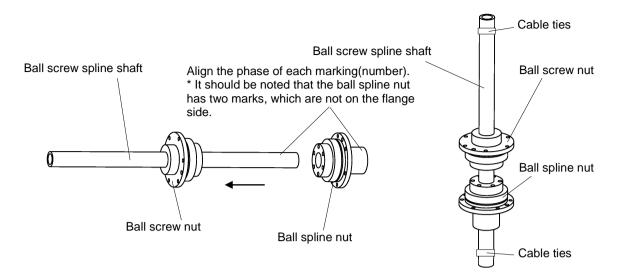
Ball screw spline nut (KHL-300, KHL-400)
